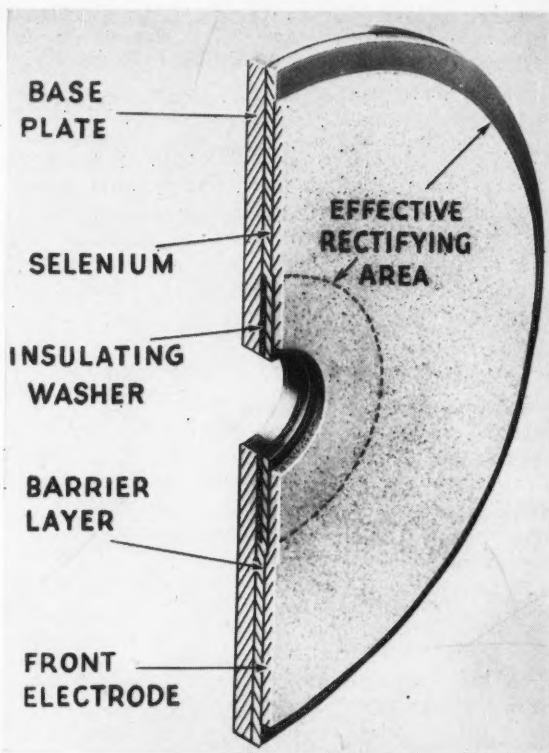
Cross sectional view of center contact selenium rectifier plate showing insulating washer.
